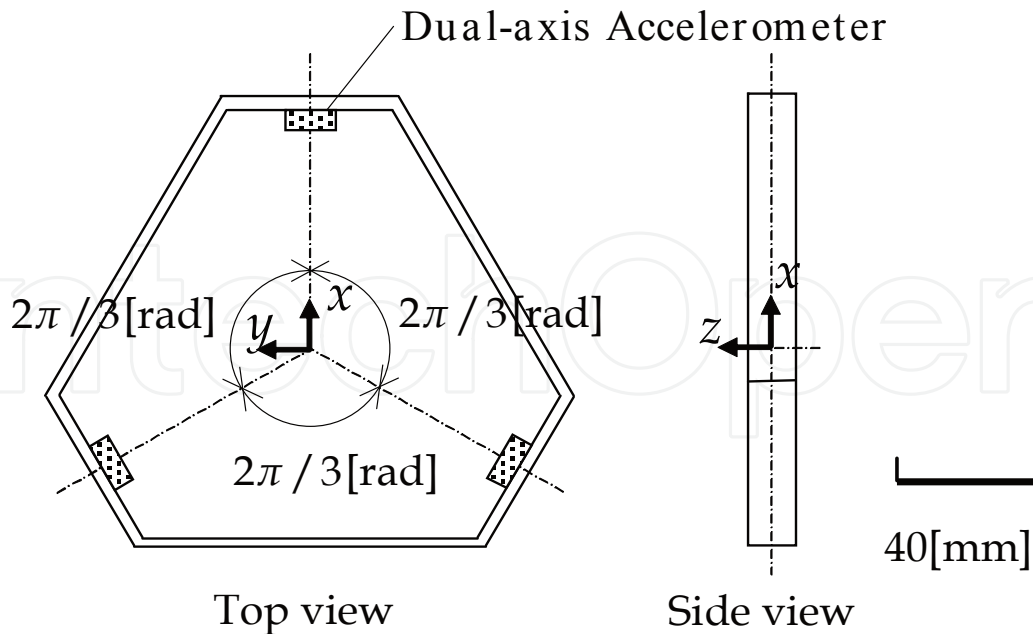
Outline drawing of a prototype 6-DOF accelerometer
